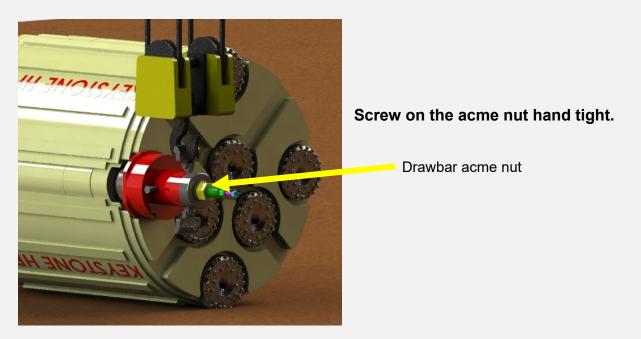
Bit Removal: Cylinder and Acme Nut Installed
